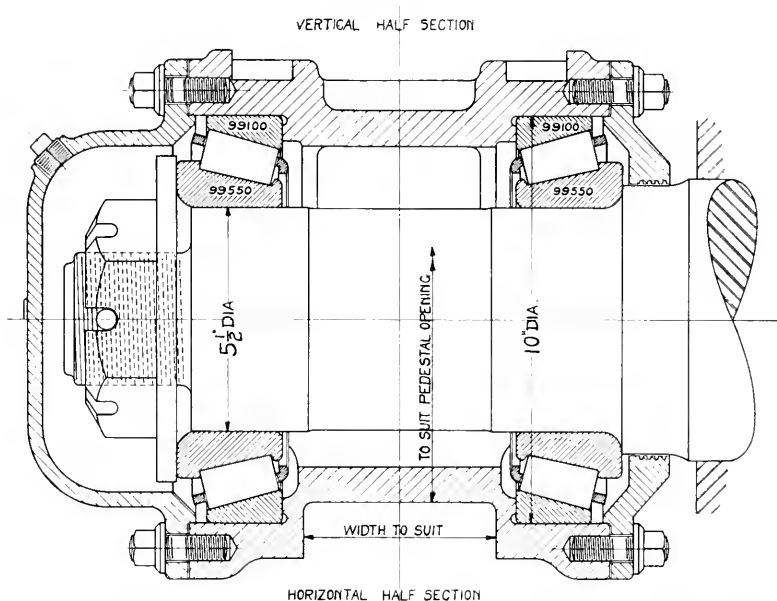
"Hour-glass type of tapered roller bearing journal application for use in existing plain bearing truck pedestal. This application will interchange with plain bearings.
